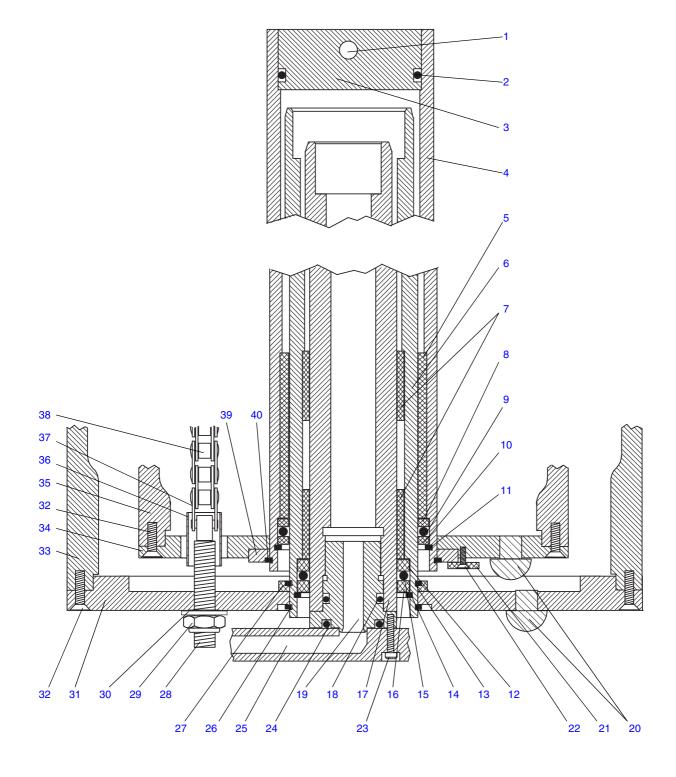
Fulmar Pedestal - Ram Assembly and Ram Plates
